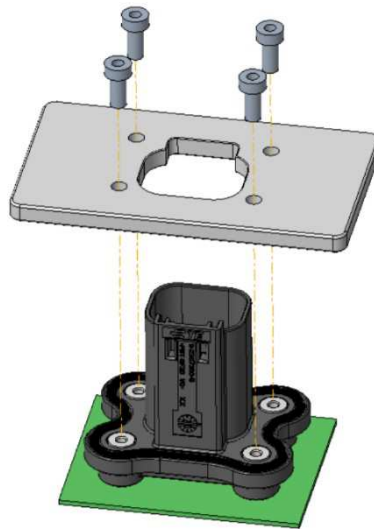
a: DT Highspeed 180 Degree Header assembly to Panel
